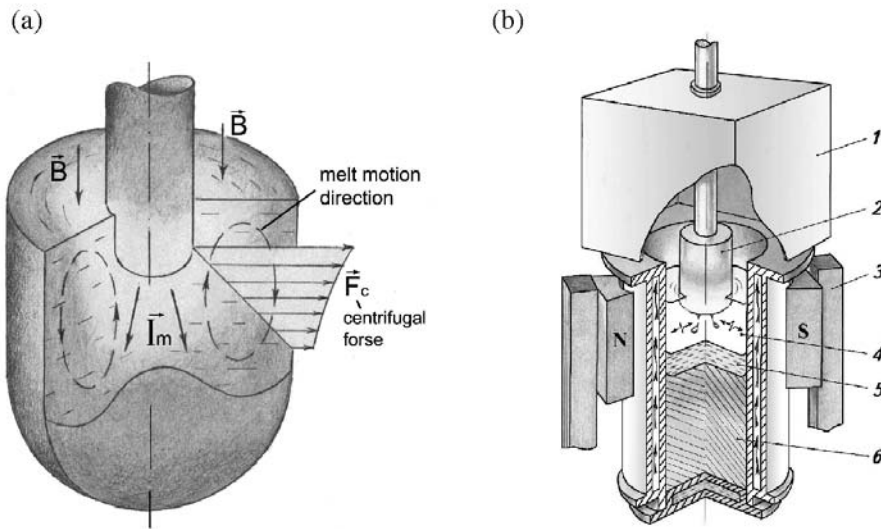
(a) – Welding (melting) in a longitudinal magnetic field; (b) Melting in a transverse magnetic field: 1 – vacuum chamber, 2 – electrode, 3 – electromagnetic system, 4 – slag pool, 5 – metal pool, 6 – ingot.
